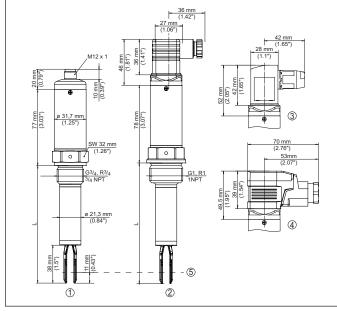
VEGASWING, high temperature versions, threaded fittings
